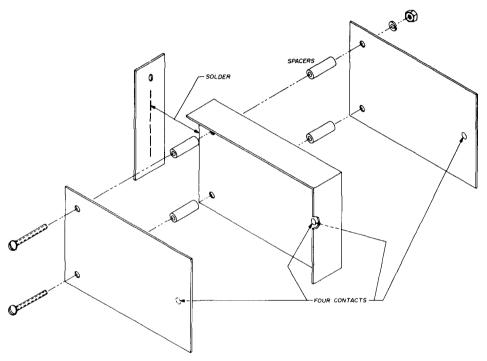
Squeeze paddle detalls. The middle double-sided PC board carries the stationary contacts. Single-sided PC board is used for the dot and dash paddles.
